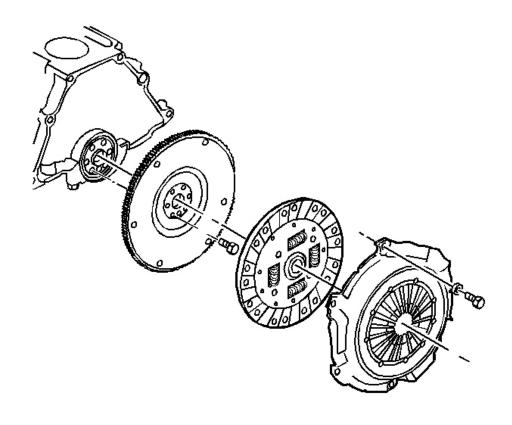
View Of Clutch Cover And Clutch Disc Courtesy of GENERAL MOTORS CORP.
